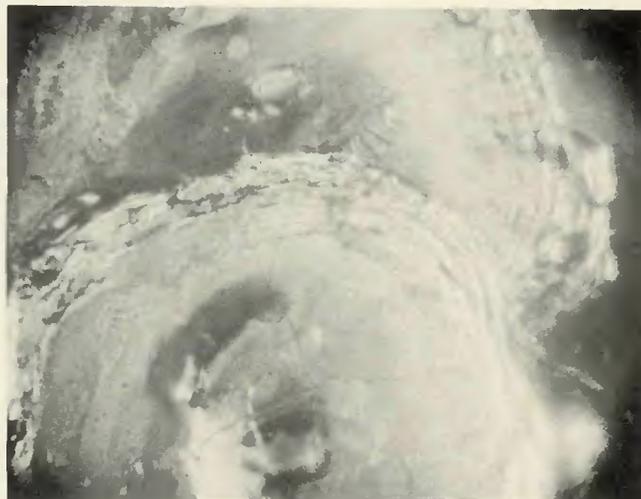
Radial cracks in weld spots. Weld spots were made with a Nd-doped glass rod laser. 24 joule pulses focused at  $-0.030$  in. were used. X50, reduced 29%
